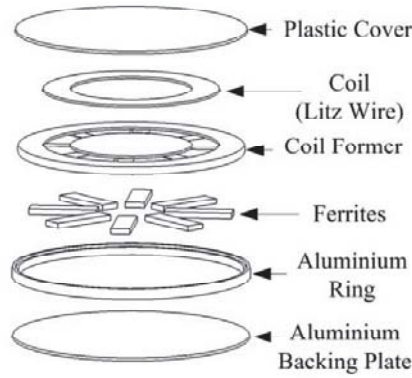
Exploded diagram of a Litz wire coil with ferrite bars and Al shielding [28].
